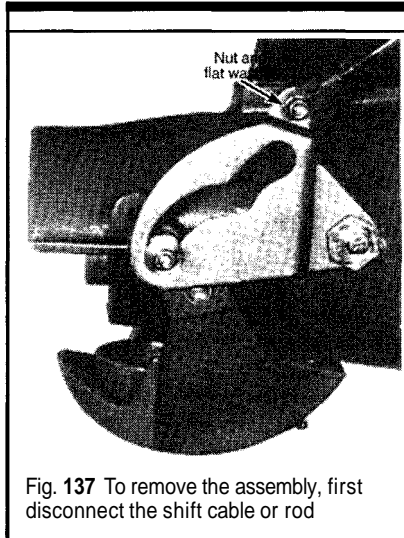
To remove the assembly, first disconnect the shift cable or rod
